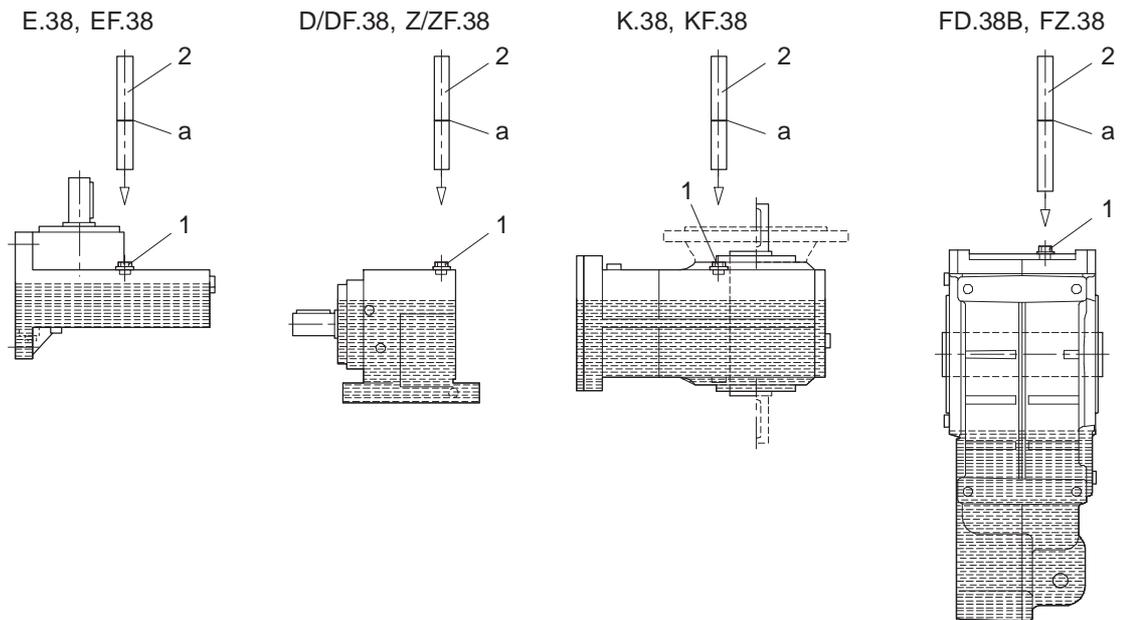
Oil level check on size 38 gear unit
